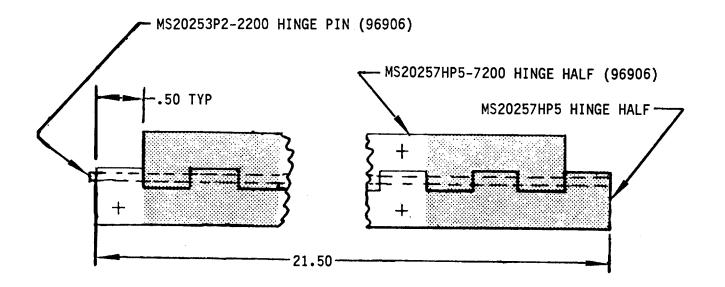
, Fabrication of Brace Strap Assembly, P/N 85SDSCC-D-0007-102
